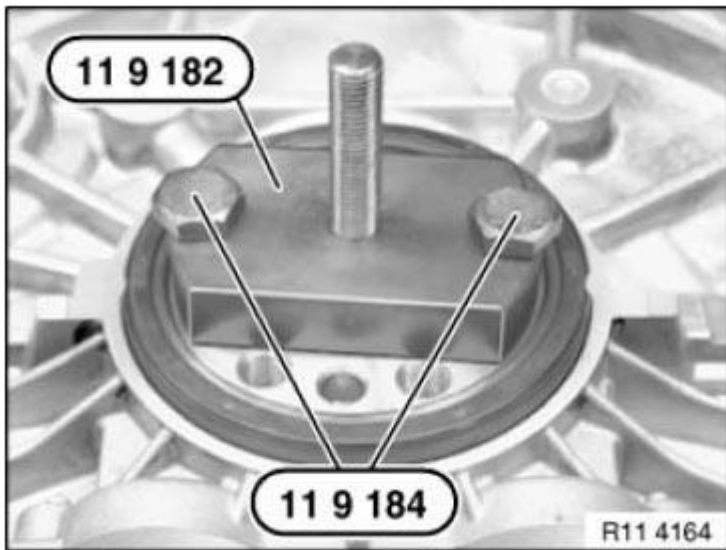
Screwing Special Tool 11 9 182 With Screws (Special Tool 11 9 184) To Crankshaft
